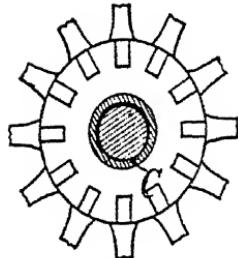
Section through a carriage hub, showing an ordinary bearing.
